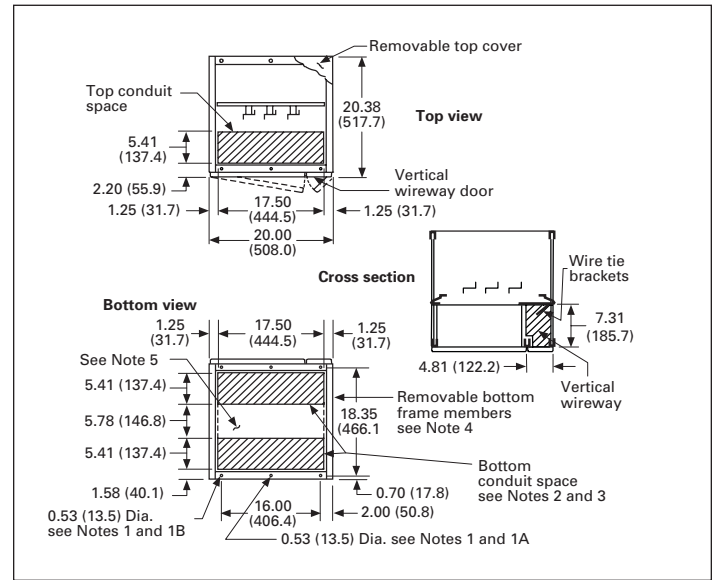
20 inches wide, 21 inches deep, front mounted only (4710A31)
